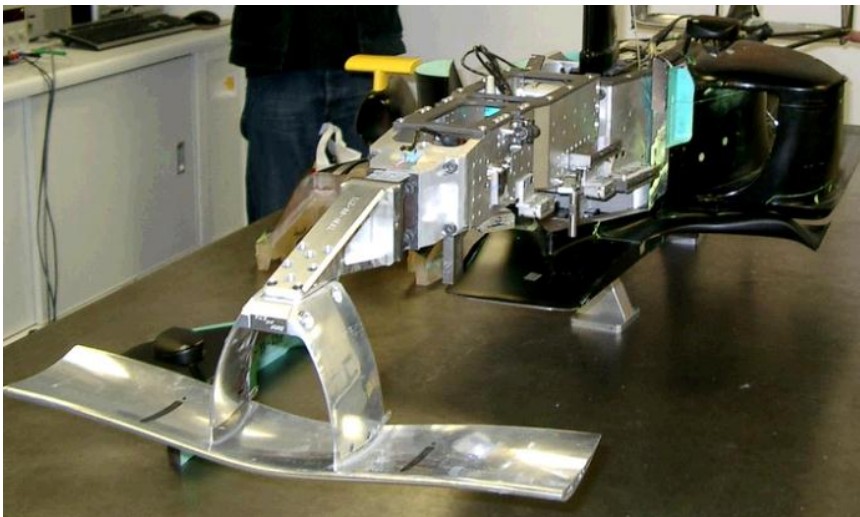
Example of a wind tunnel model spine made of CNC-machined parts
